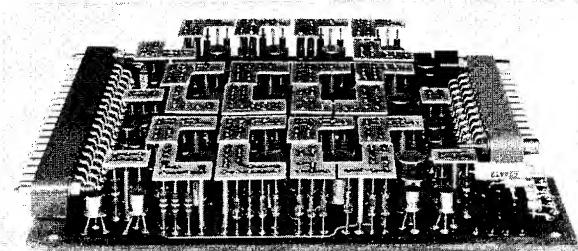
Cordwood assembly which utilizes a four-layer Encapsulayer as the "mother" board.
